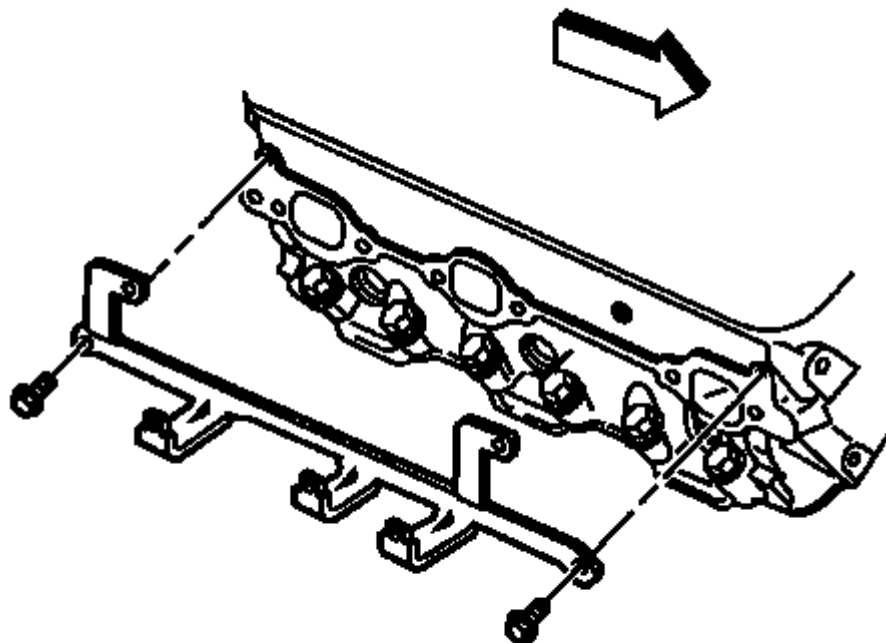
View Of Spark Plug Wire Support Bolt (Right)
